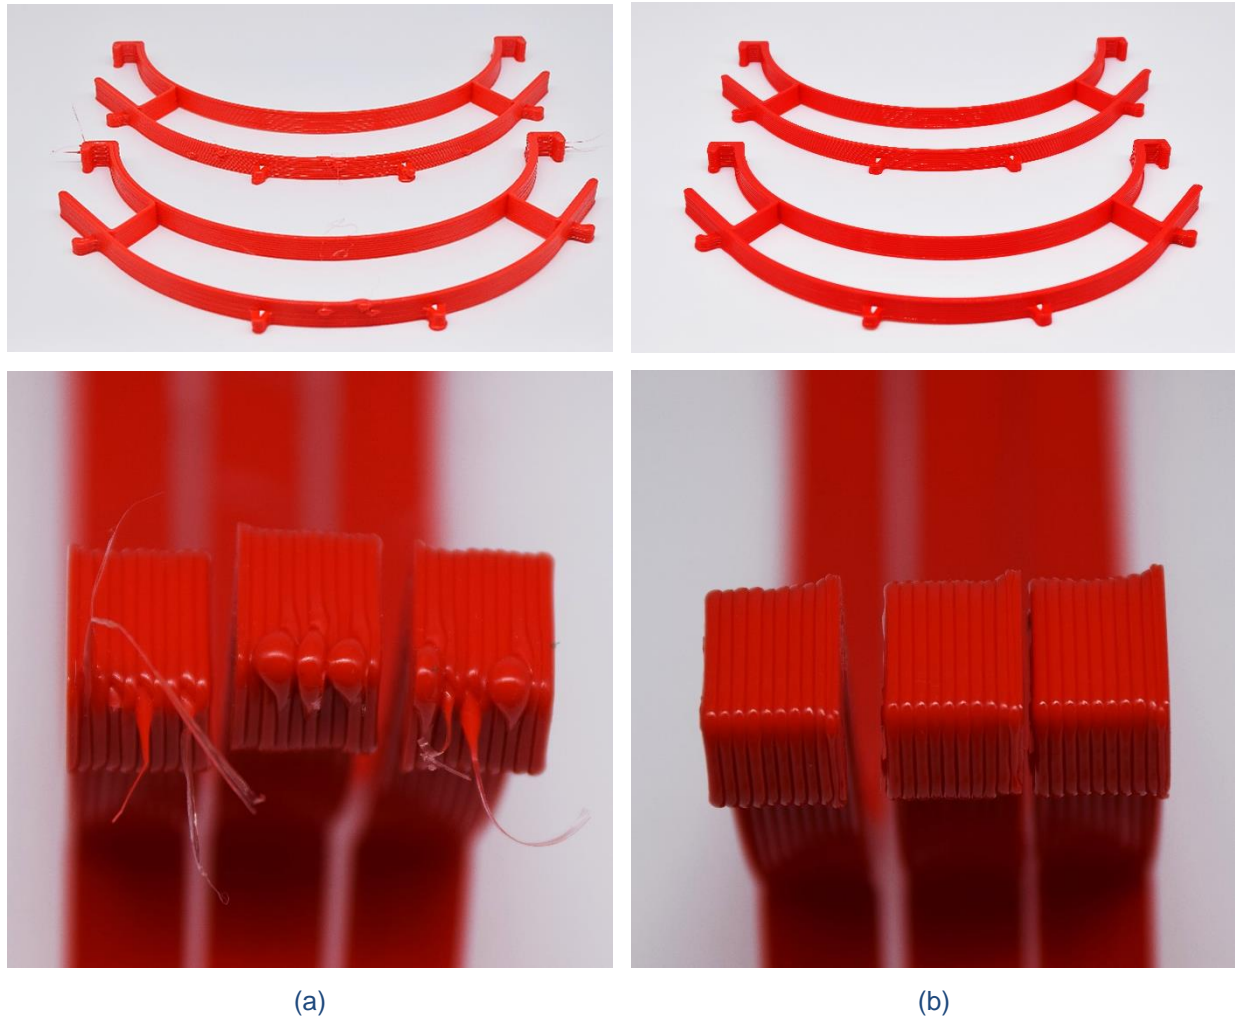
3D Printed headbands using (a) a parallel printing toolpath, creating surface artefacts and (b) a sequential printing toolpath, with no surface artefacts.
